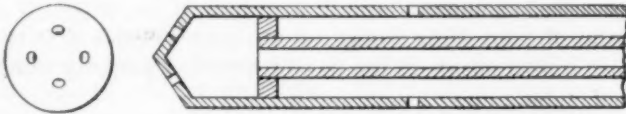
SPECIAL FORM FOR IMPACT END OF TUBE
